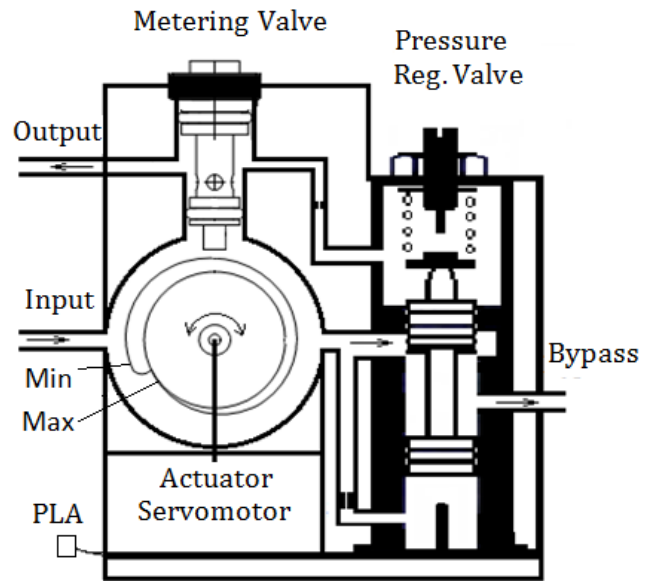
Flow control valve schematic, equipped with pressure compensator valve
